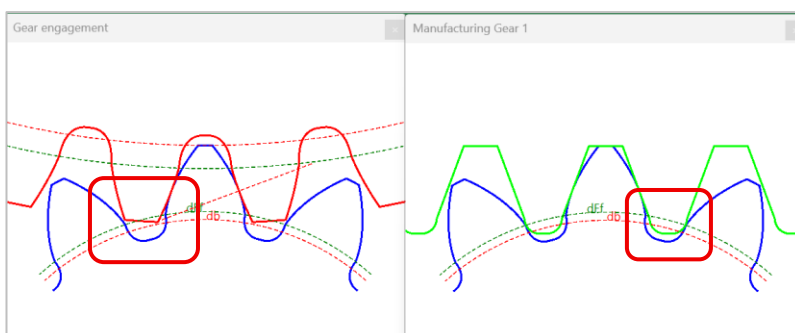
Left: Engagement, gears with undercut. Right: Engagement of tool reference profile to gear, tool with protuberance.
